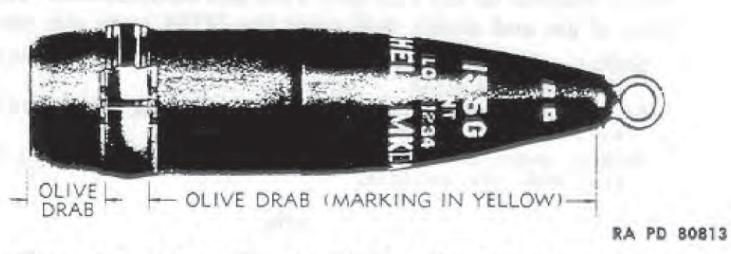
SHELL, H.E., Mk. IIIA1, Unfuzed, 155-mm Guns, M1917-17A1-18MI
